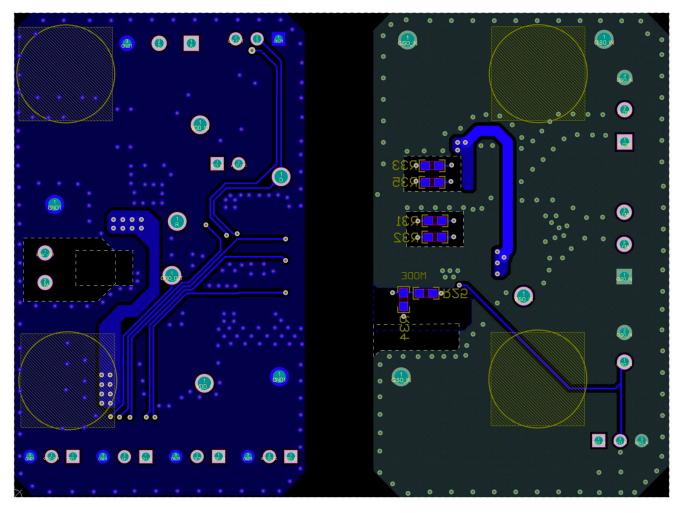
ISOW1432DFMEVM PCB Layout - Bottom Layer
